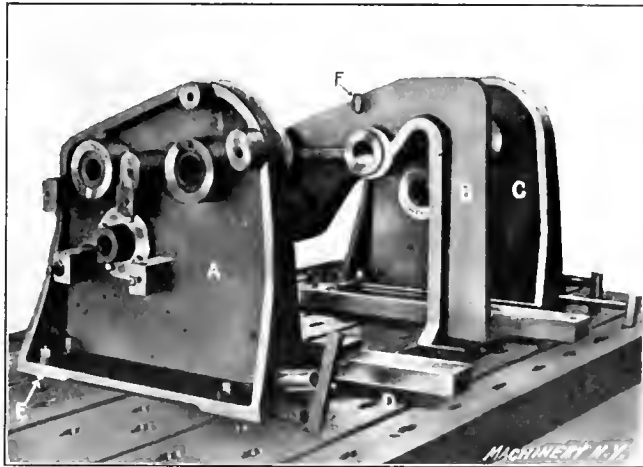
Boring Jig consisting of Base-plate and Separate Removable Upright carrying the Guide Bushings.
